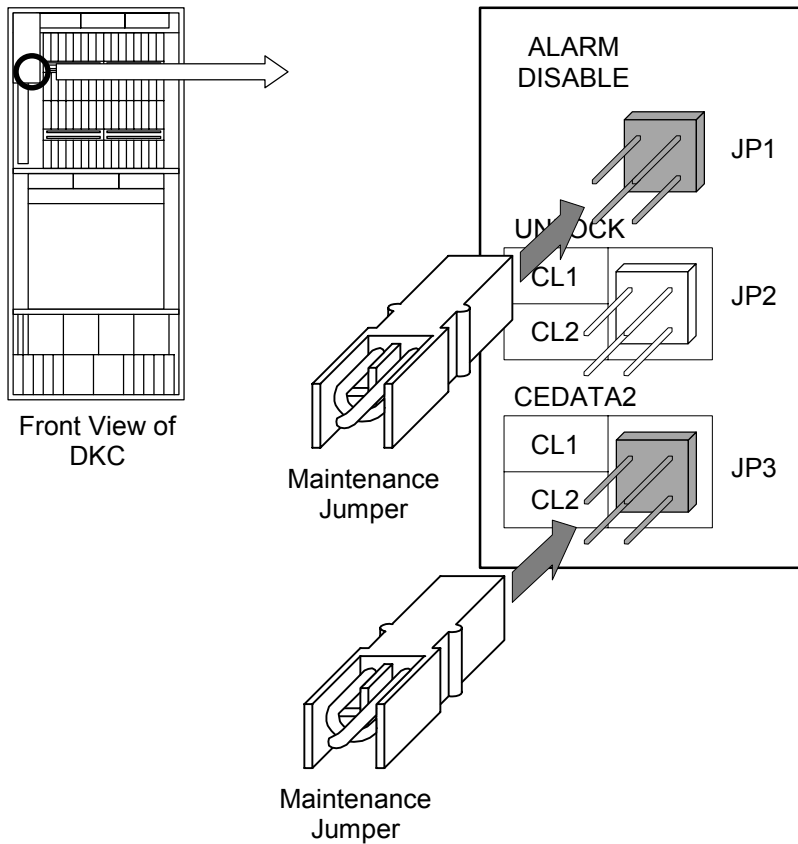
Setting of Jumper Socket on DKC PANEL PCB
